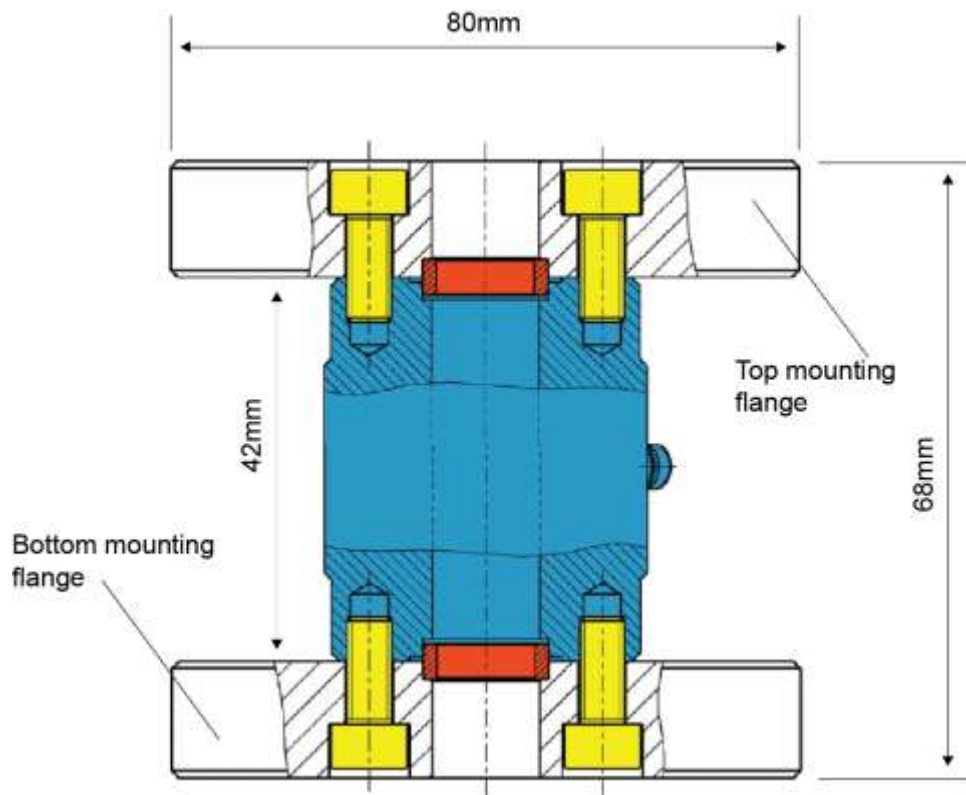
2-Component Load Cell Sensor with Top and Bottom Mounting Flanges
